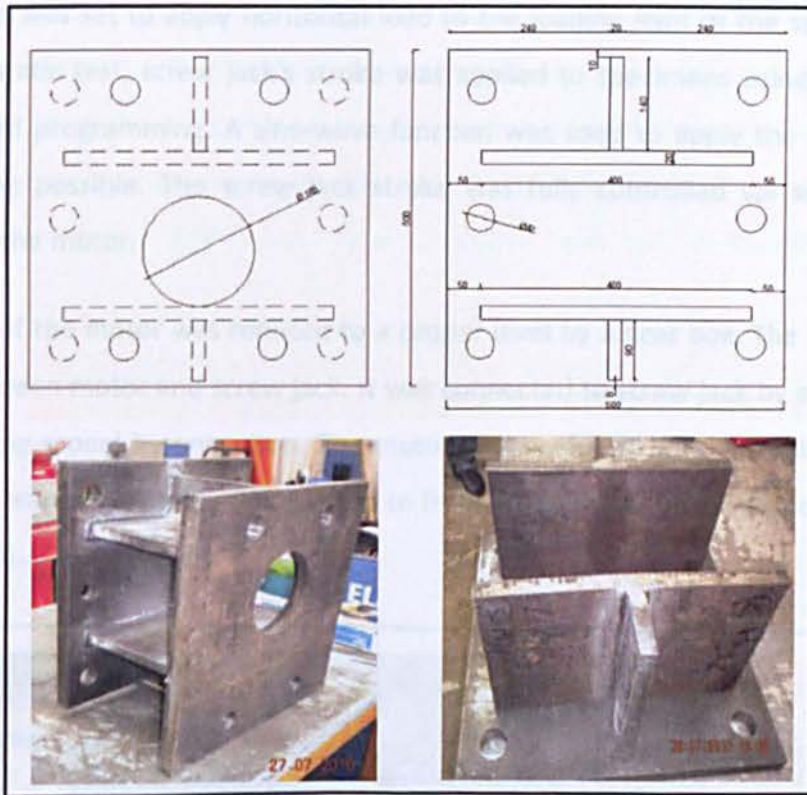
Detailed design and manufactured rigid connection box (all dimensions in mm)
